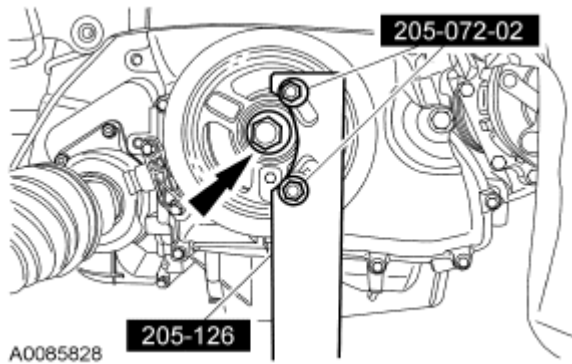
Identifying Special Tools Assembly (205-072-02, 205-126) And Crankshaft Pulley Bolt
